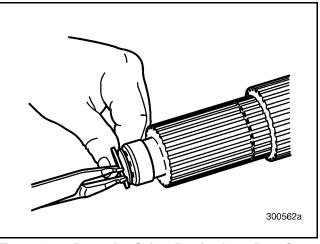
Removing Spigot Bearing Inner Race Snap Ring
